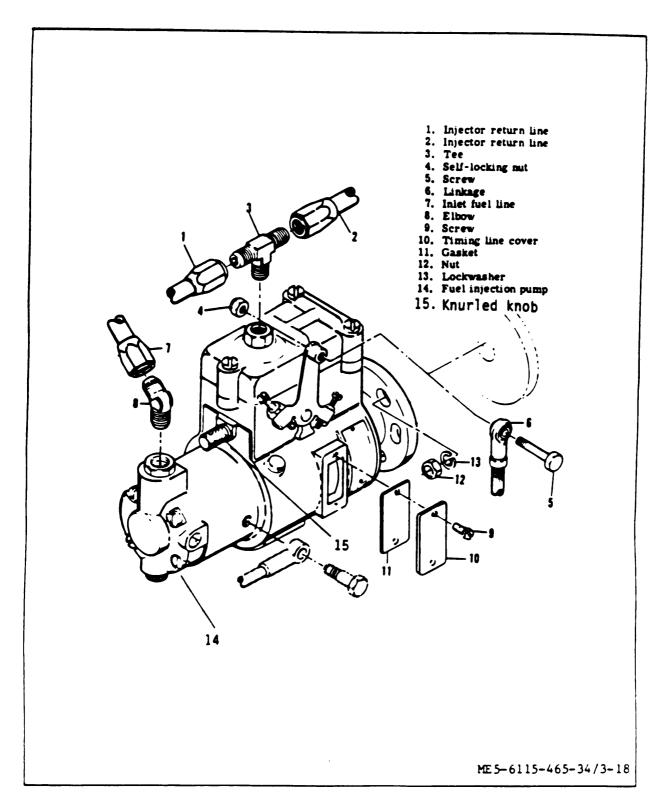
Fuel Injection Pump Assembly, Removal and Installation
